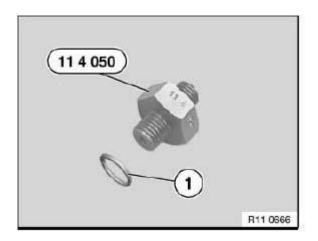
Identifying Special Tool (11 4 050) And Sealing Ring Courtesy of BMW OF NORTH AMERICA, INC.
